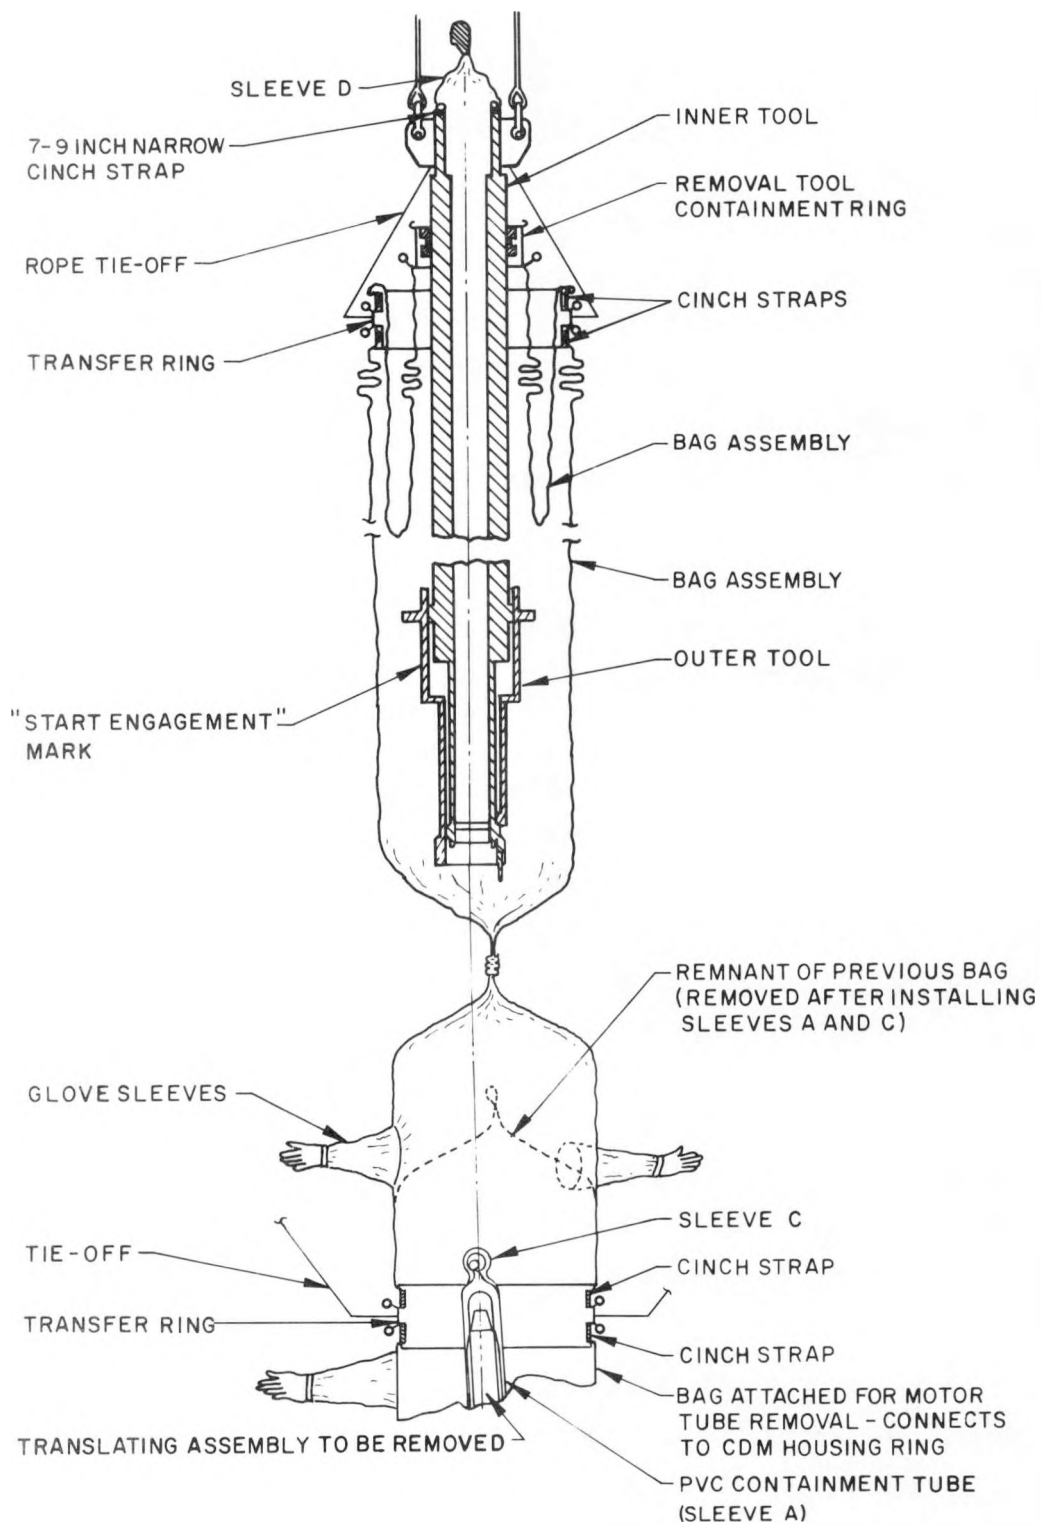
Three-Part Containment for Translating Assembly Removal Showing Three Auxiliary Sleeves
